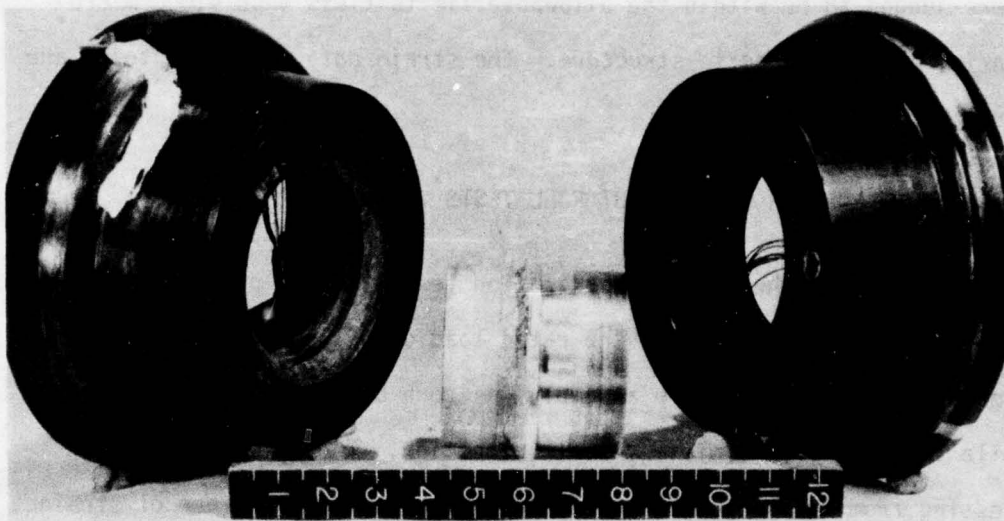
G/E Wheel after 1800 Mile Straight Roll 400 Mile Camber Roll
